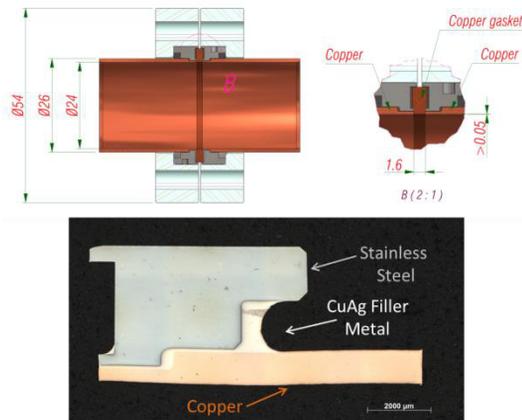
Section view of a circular vacuum flange assembly (top) and section cut of an as-brazed flange (bottom).
